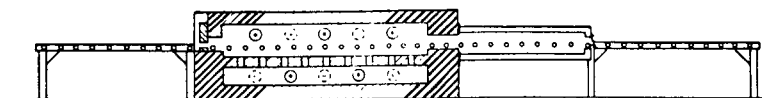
Example of a Continuous Roller Hearth Furnace.
